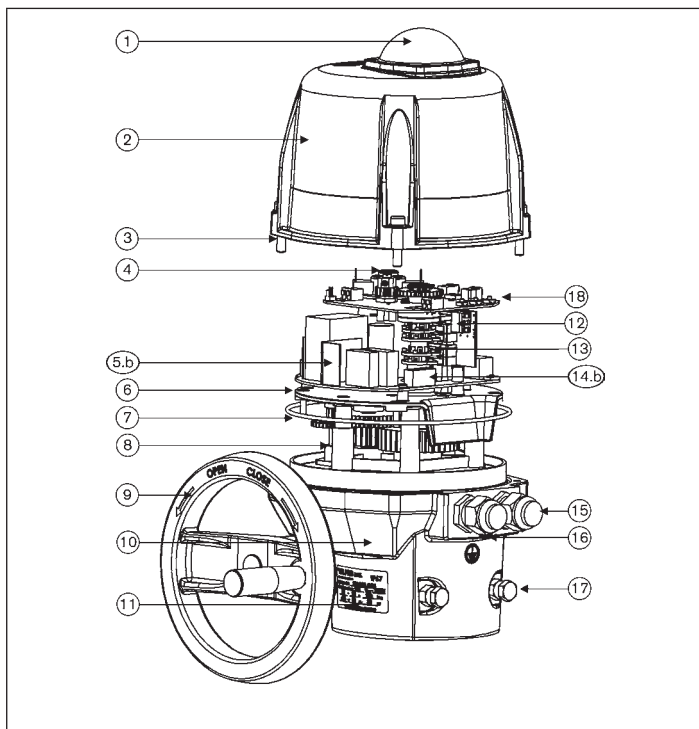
Exploded views Motor 100 - 300 Nm with control card
